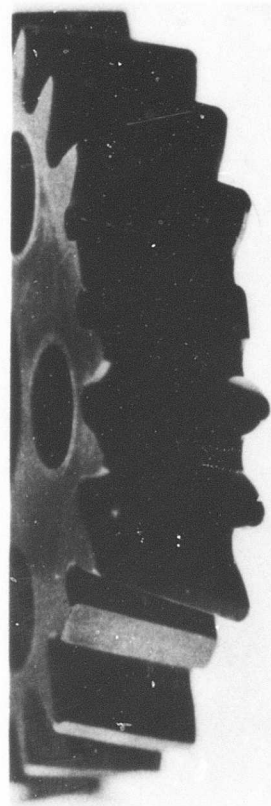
Blacklight Photograph of Test Gear, Showing a Crack Indicated by Fluorescent Penetrant Inspection Across the Helical Involute Surface of a Test Tooth (Magnification: 1×).
